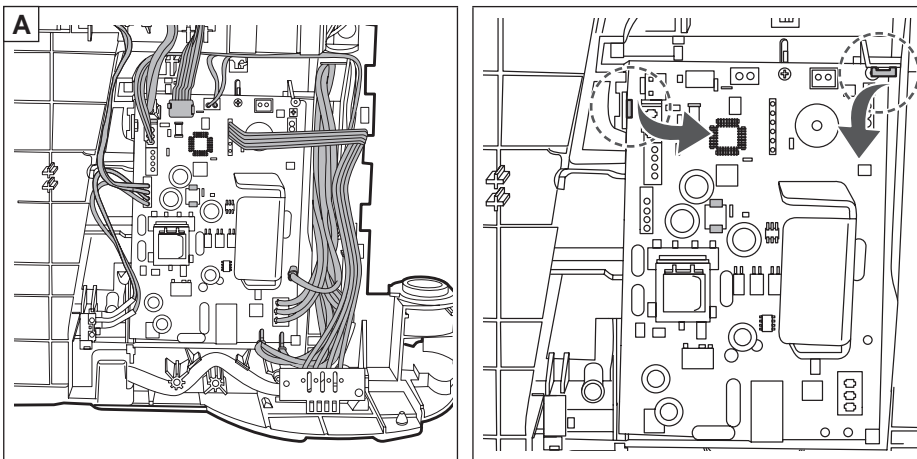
Figure A: disconnect all the wirings present and remove the electronic card while using the two points shown as lever.
